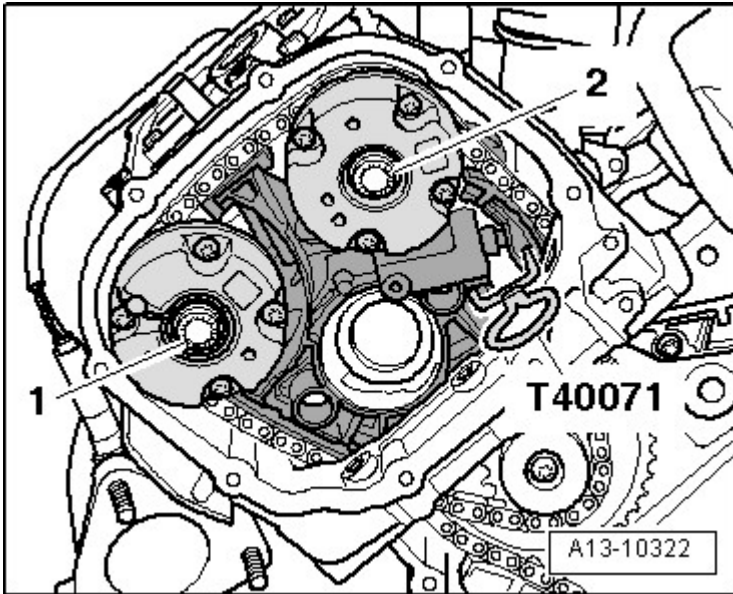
Identifying Bolts On Left Cylinder Head And Removing Both Camshaft Adjusters
